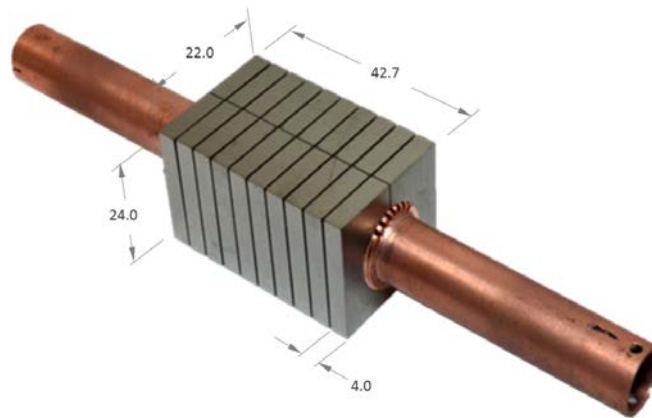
Showing an example of an assembled thermal break structured interlayer component prior to the insertion of swirl tubes in readiness for high heat flux testing.
